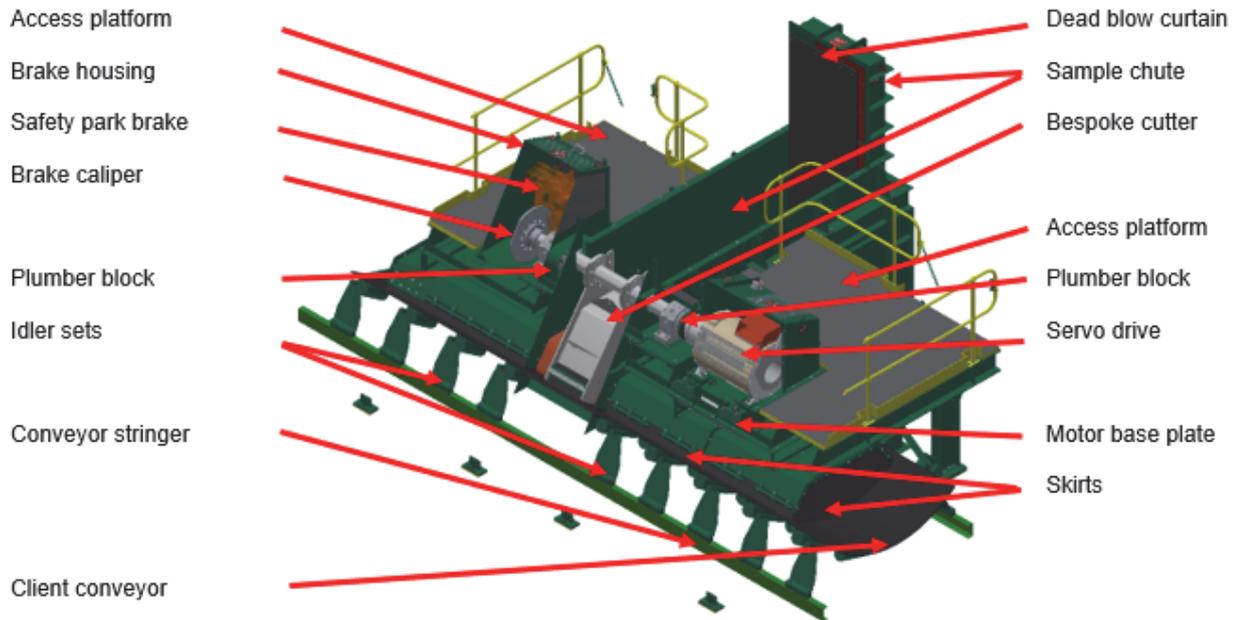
Main components of the hammer sampler seen from the drive end – sectional view without support frame. Handrails appear incomplete resulting from the sections made on the model to show the operational parts.
